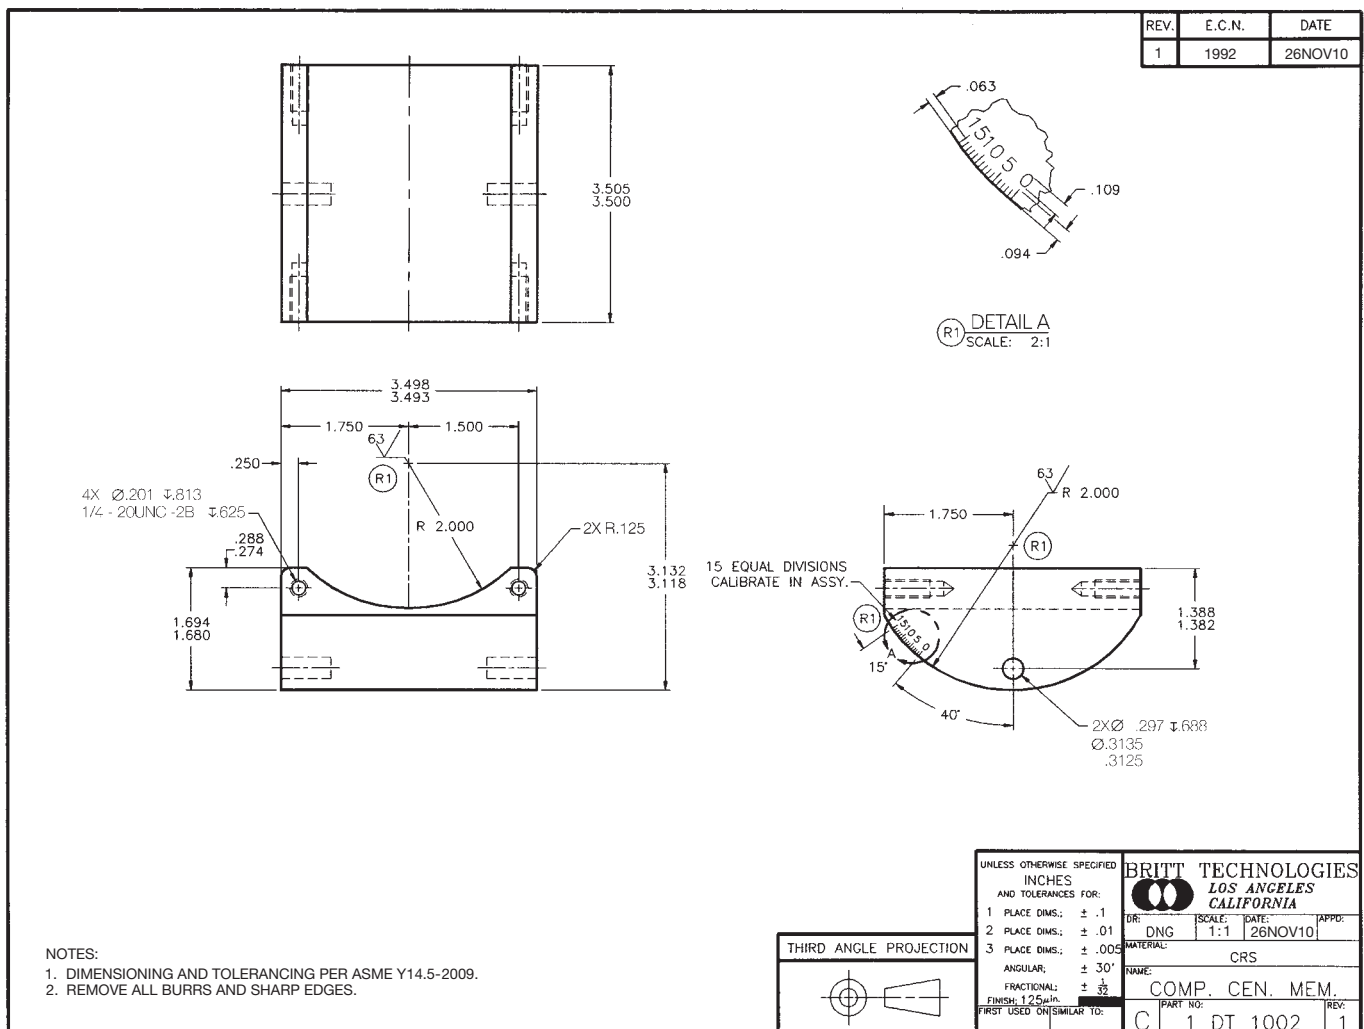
An actual industry drawing with three principal views and a view enlargement used to describe the part.
